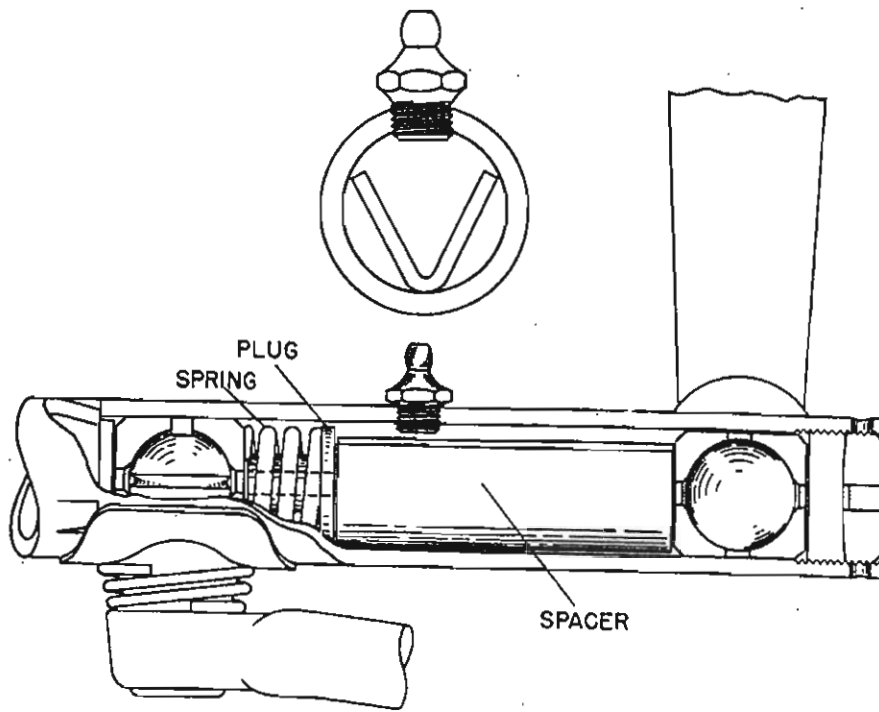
Pitman Arm Side of Steering Connecting Rod. Idler Lever Slide Also Is Assembled in This Manner
